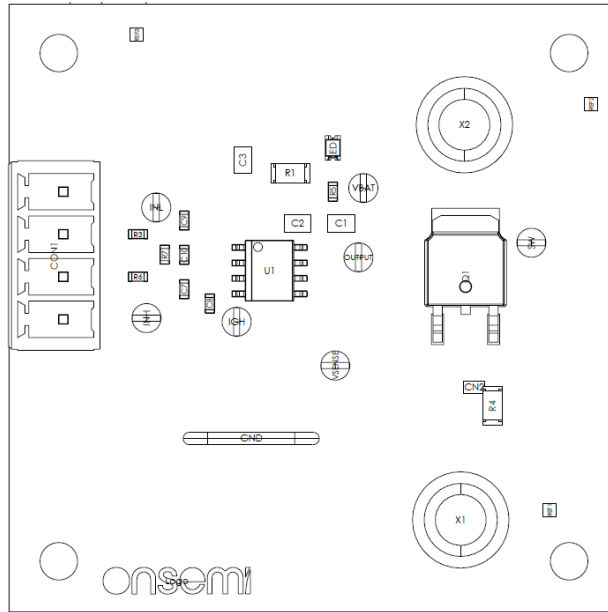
FAD1110EVB PCB Top Assembly Drawing
